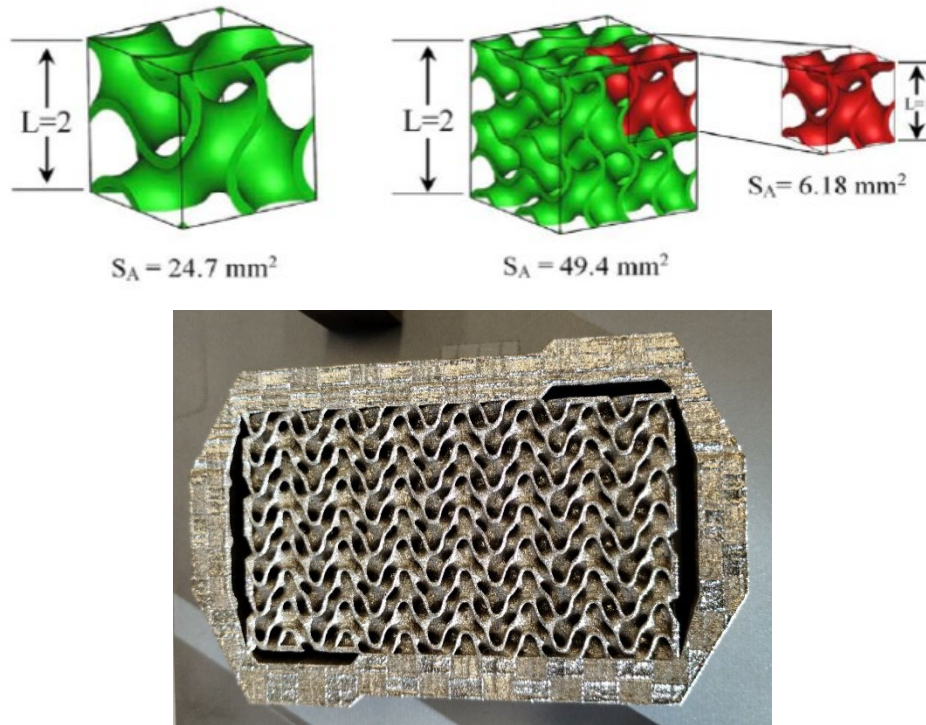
Drawing and photo of heat exchanger with large surface area compared to volume. Prototype in stainless steel produced at KTH using additive manufacturing.
